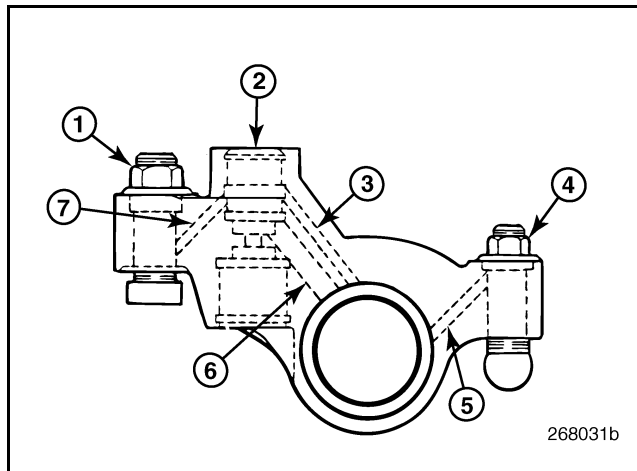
MACK Engine Brake Exhaust Rocker Arm with Hydraulic Actuator
